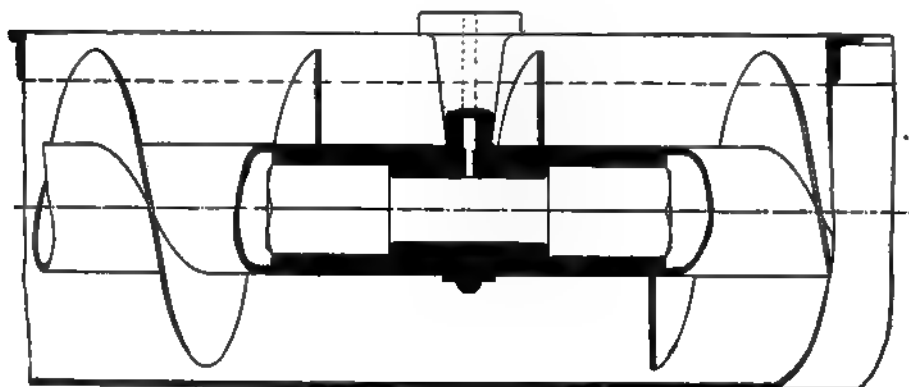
Longitudinal Section of Worm Conveyor Bearing.
